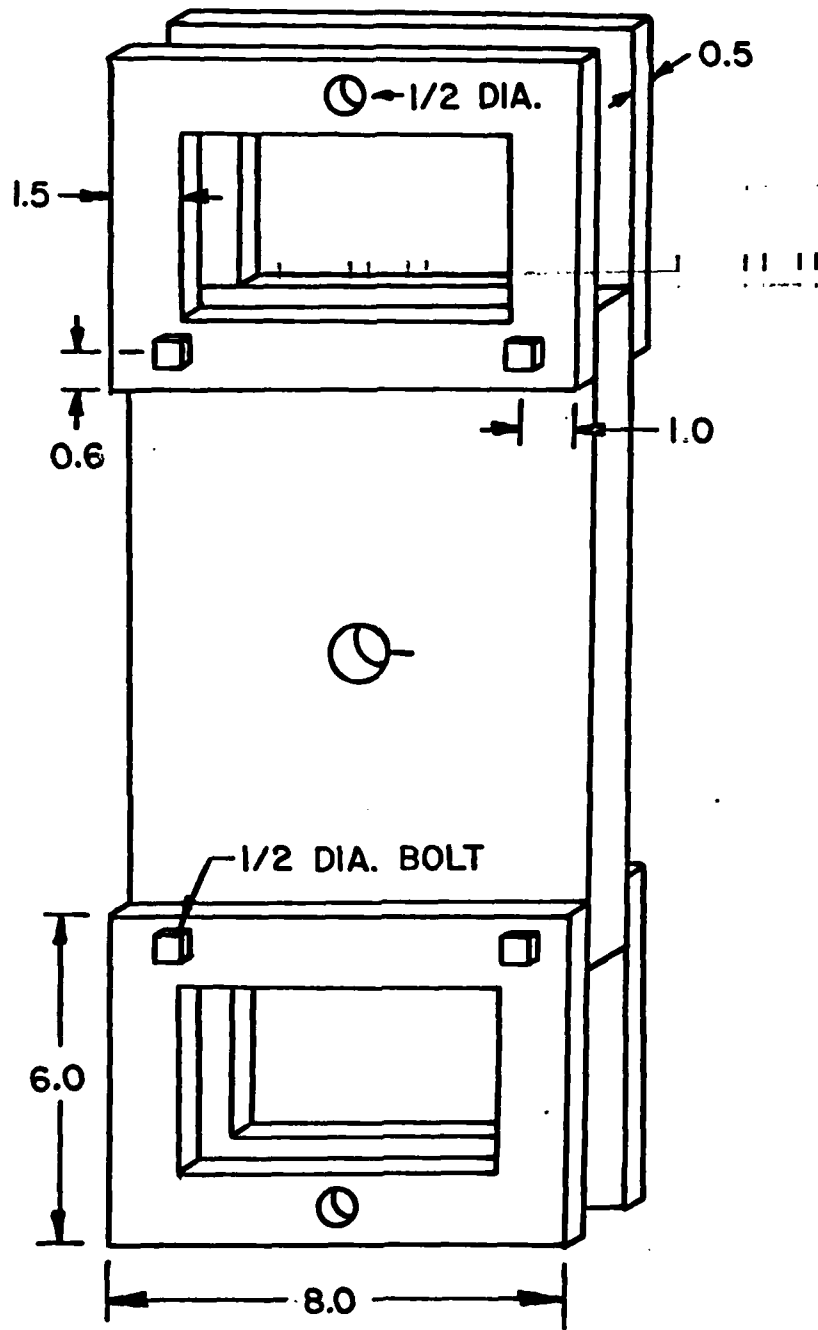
Schematic View of a Plate Specimen Fastened to the Test Grips (All Dimensions in Inches)
